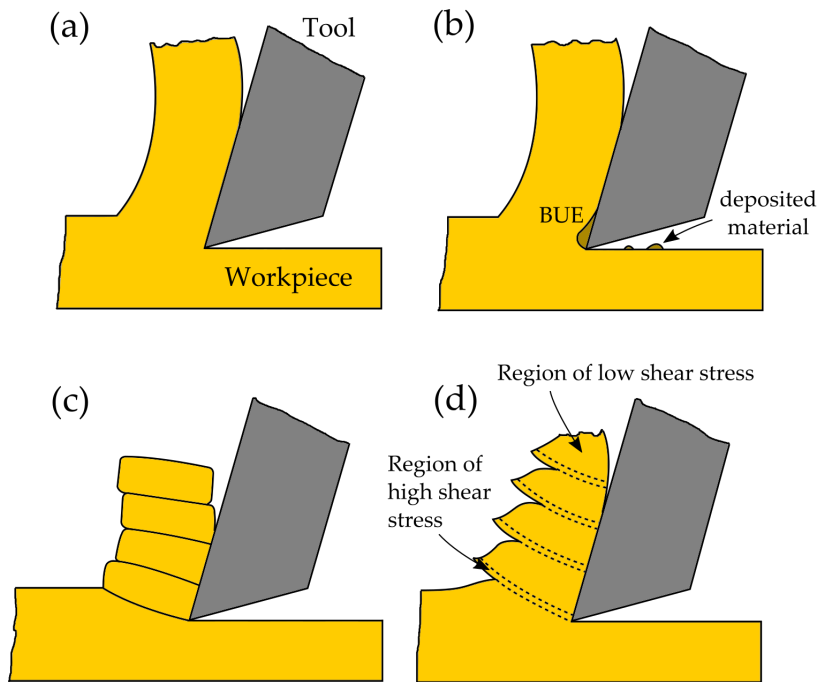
Types of chip that occur when machining material: (a) - a continuous chip, which often occurs in ductile materials in low friction situations. (b) - a built-up-edge (BUE) chip, where a portion of the chip adheres to the rake face and is later deposited on the material surface. (c) - a discontinuous chip, which occurs in more brittle materials. (d) - a serrated, sawtooth or semi-continuous chip, where regions of high and low shear stress cause the chip to shear.
